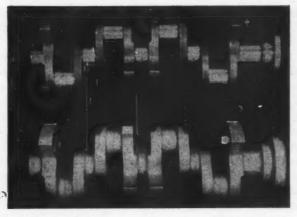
Cast-steel crankshaft for 600-horsepower tank engine. Surfaces are nitrided after machining
